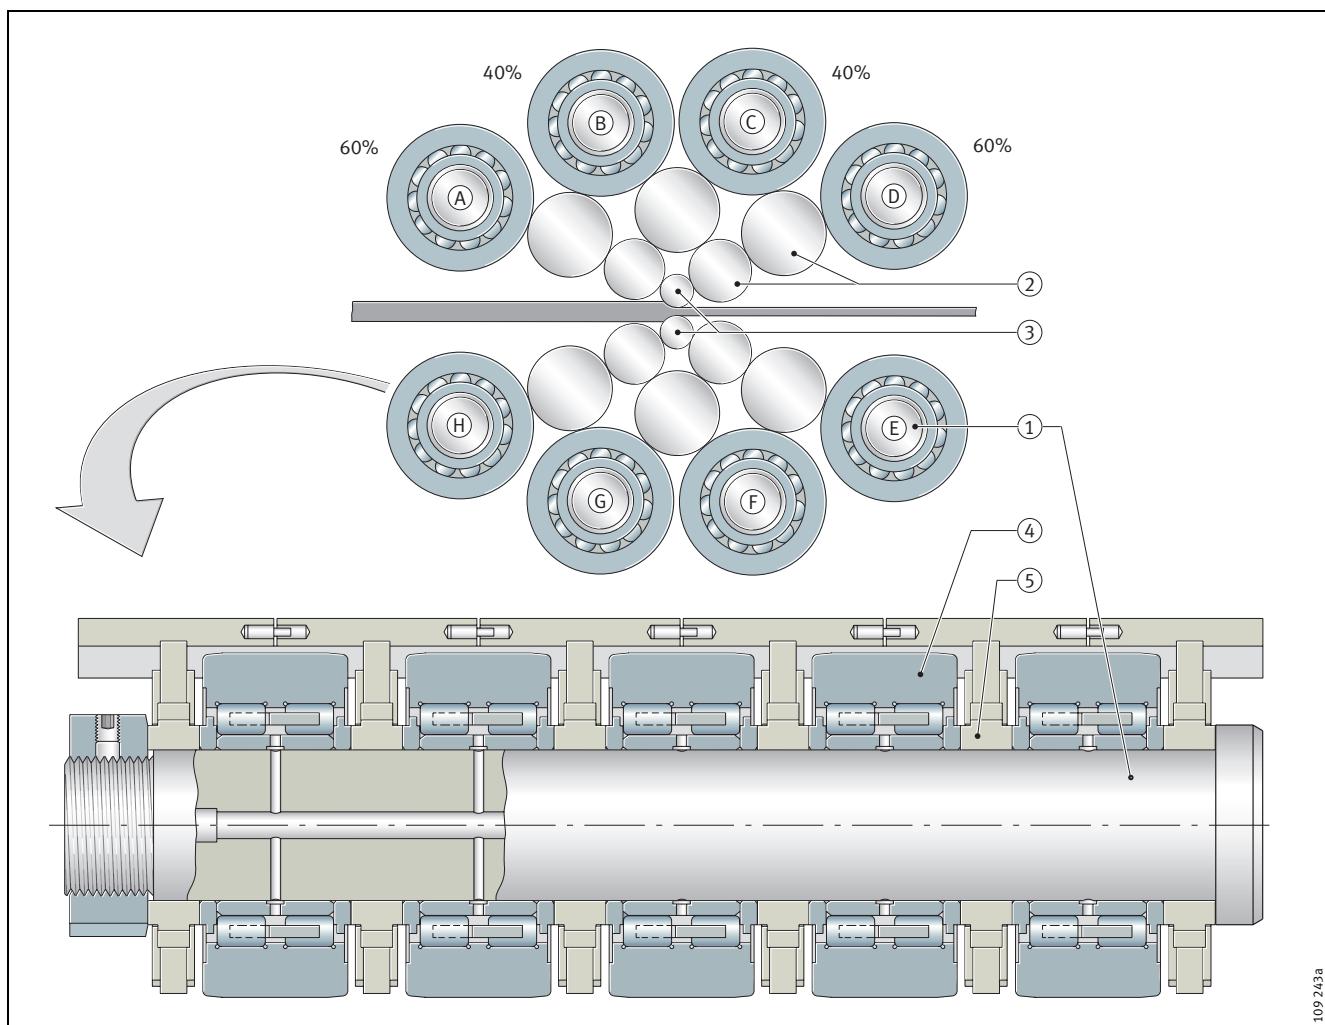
· Support shaft with back-up rollers (type 2) and support saddles
